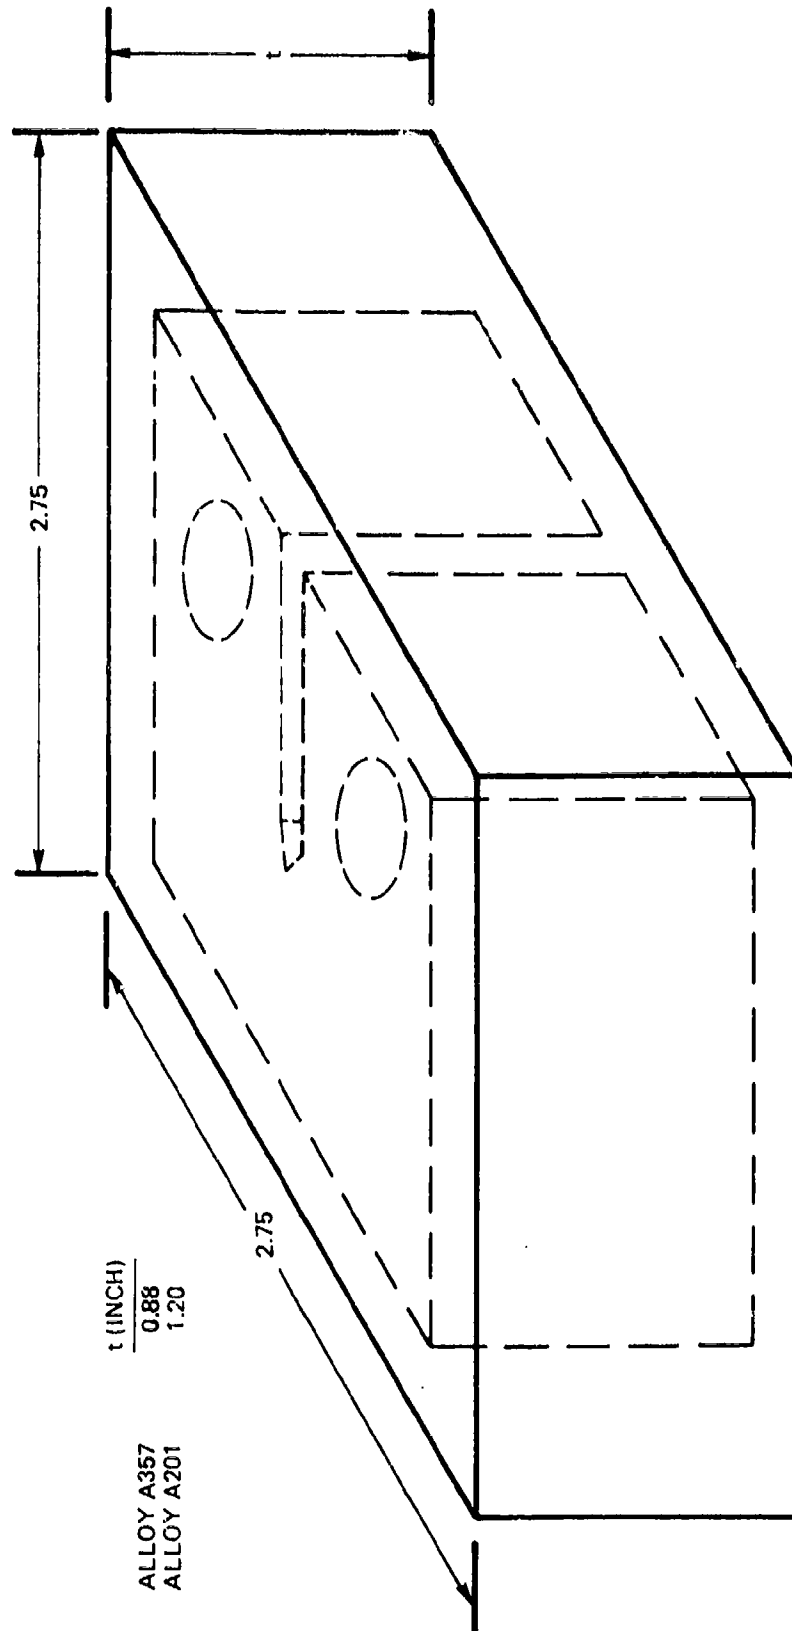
FRACTURE TOUGHNESS BLOCK CASTING
